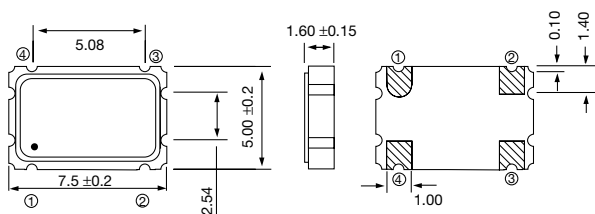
ECS-3951C/3953C Top, Side and Bottom views
